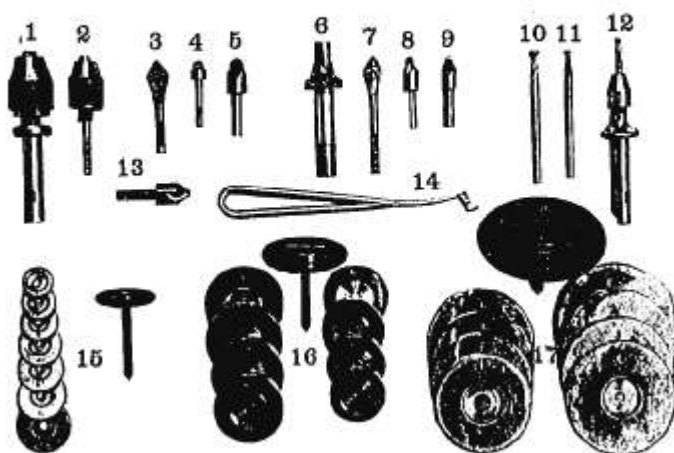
, 2, 6, Chucks. 3, 7, Conical cutters. 4, 5, 8, 9 Ball and cone cutters. 10, 11, 12, Fraises.
